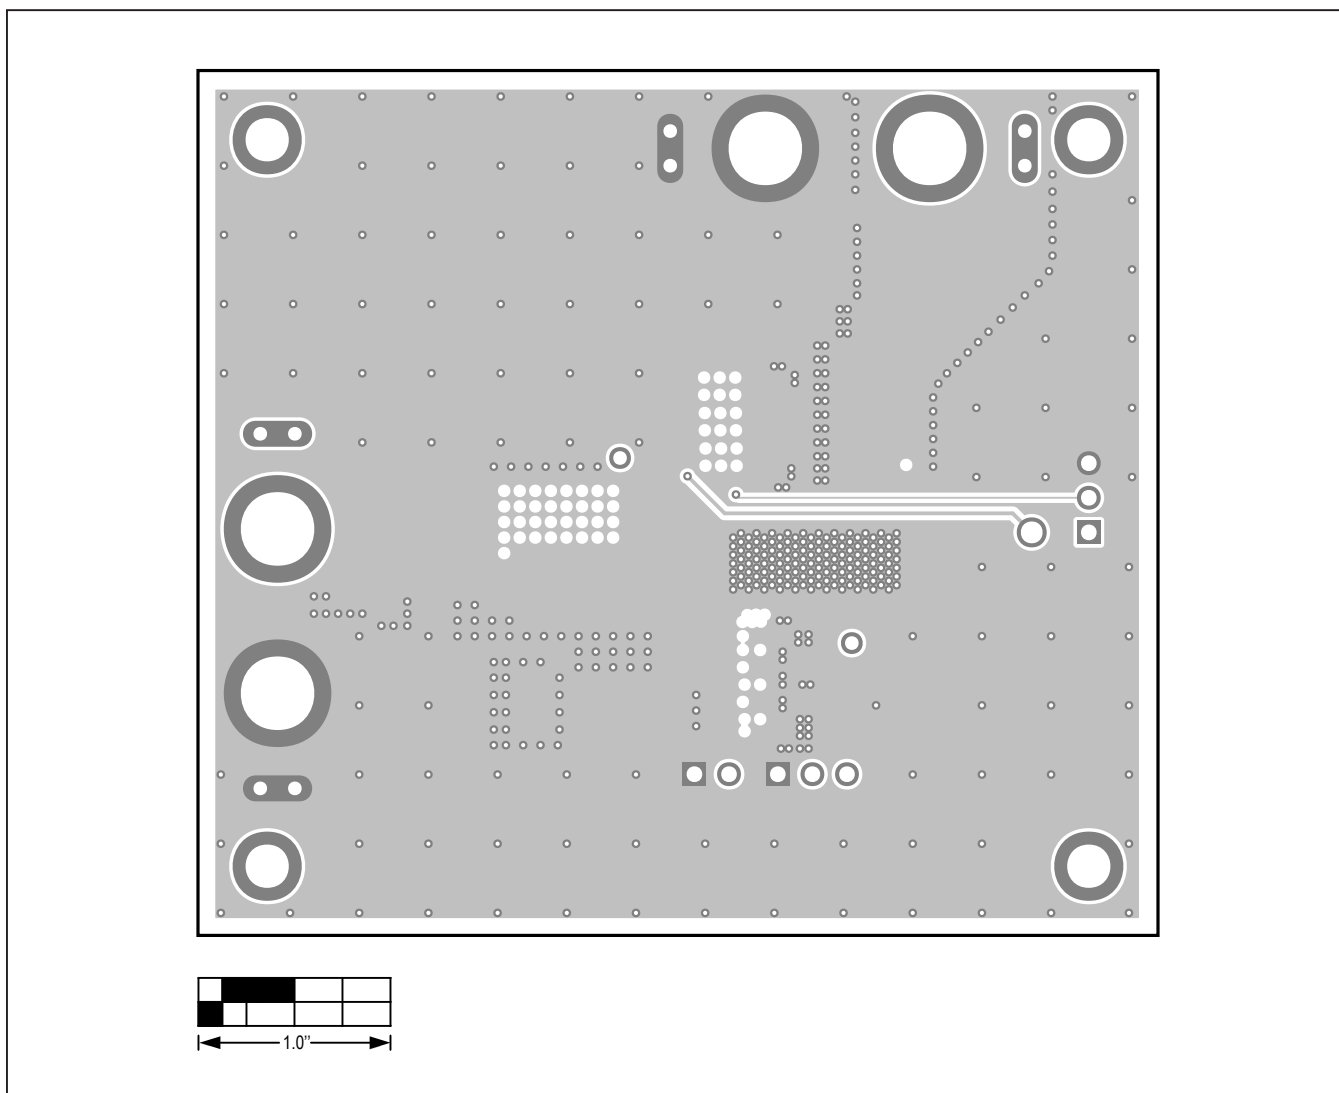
MAXM17546EVKITBE# 5V Output EV kit PCB Layout—Layer 2
